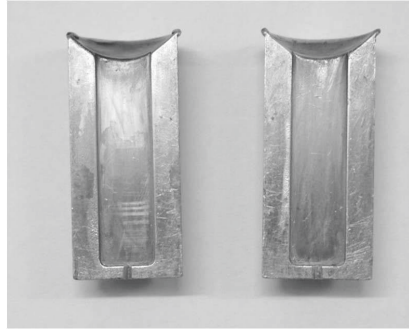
Casting mold used in the arc-melter to make master alloys
